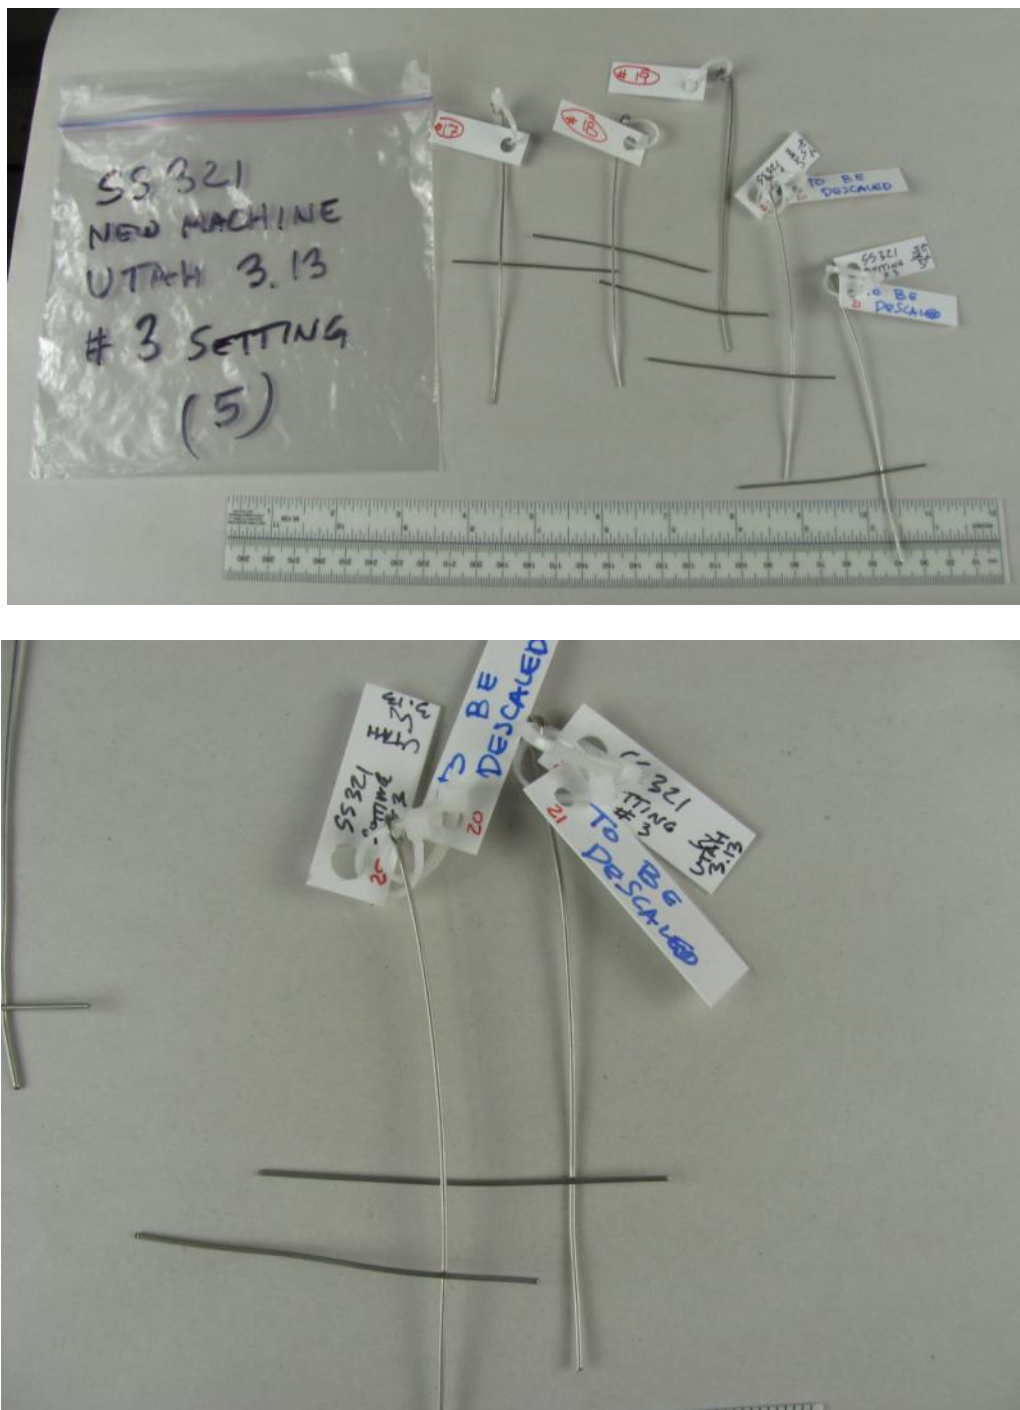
Macro photographs showing the as-received appearance of the Type 321 solid wire weld samples prior to descale / passivation and salt spray testing. Samples #17, #18, #19, #20 and #21 are shown.
